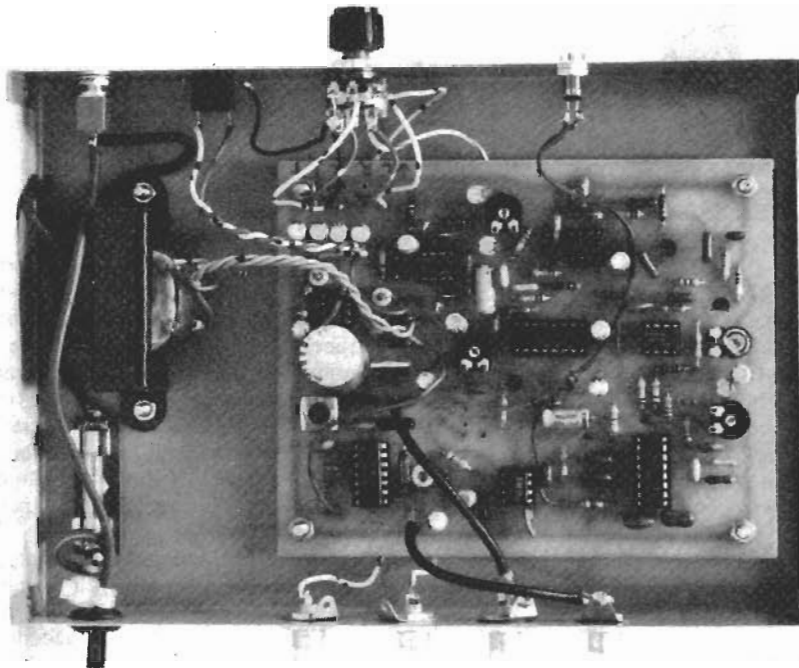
THE COMPLETED STEREO DECODER BOARD. Next time, we'll show you how to build the circuit shown here.
